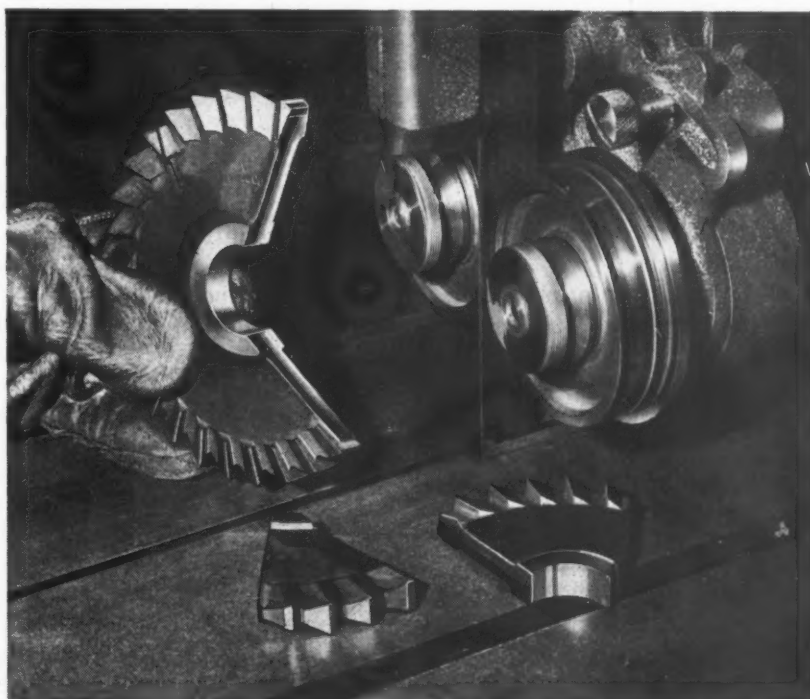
Friction Saw Gives a Smooth Finish in Salvaging High-speed Steel Milling Cutter
